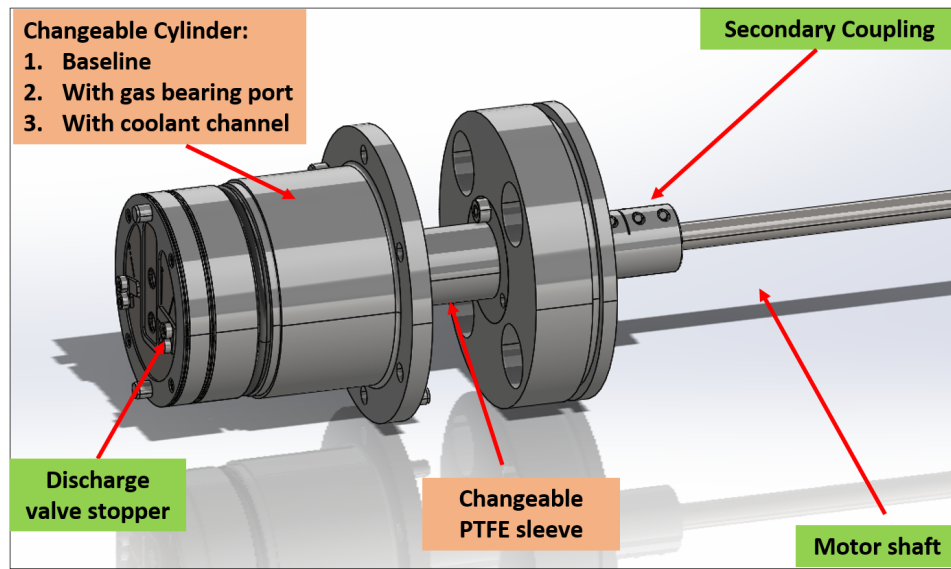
Schematic drawing of the piston and changeable cylinder assembly in prototype linear compressor.
